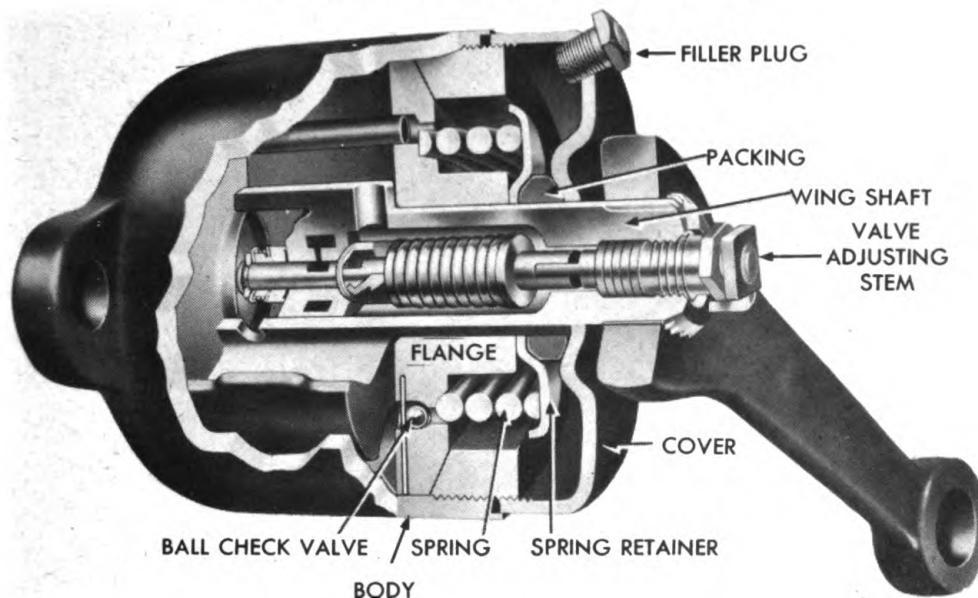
Shock Absorber - Cutaway View RA PD 77083
